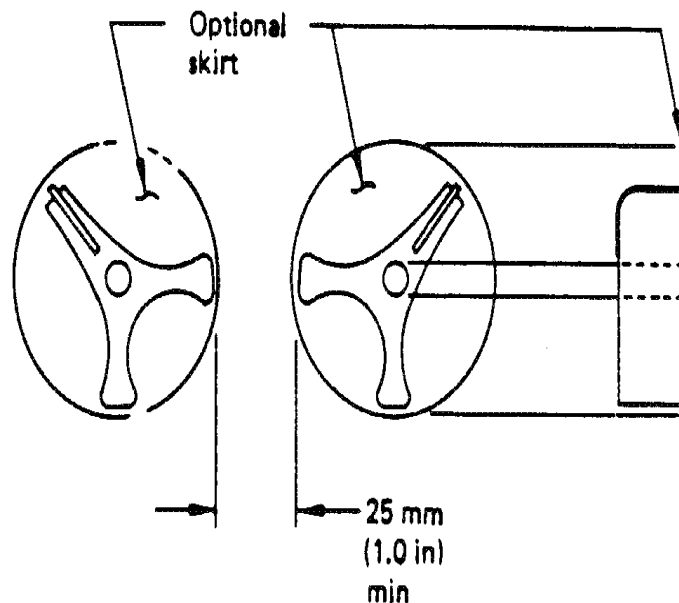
VALVE HANDLE - CENTRAL PIVOT TYPE
